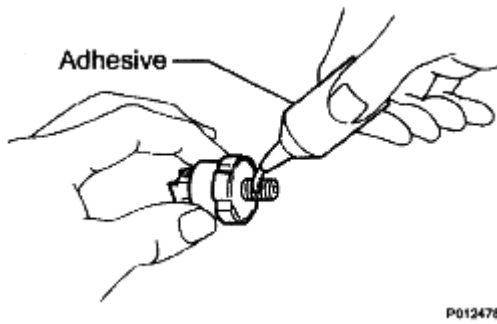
Identifying Adhesive To Threads Of Oil Pressure Switch
